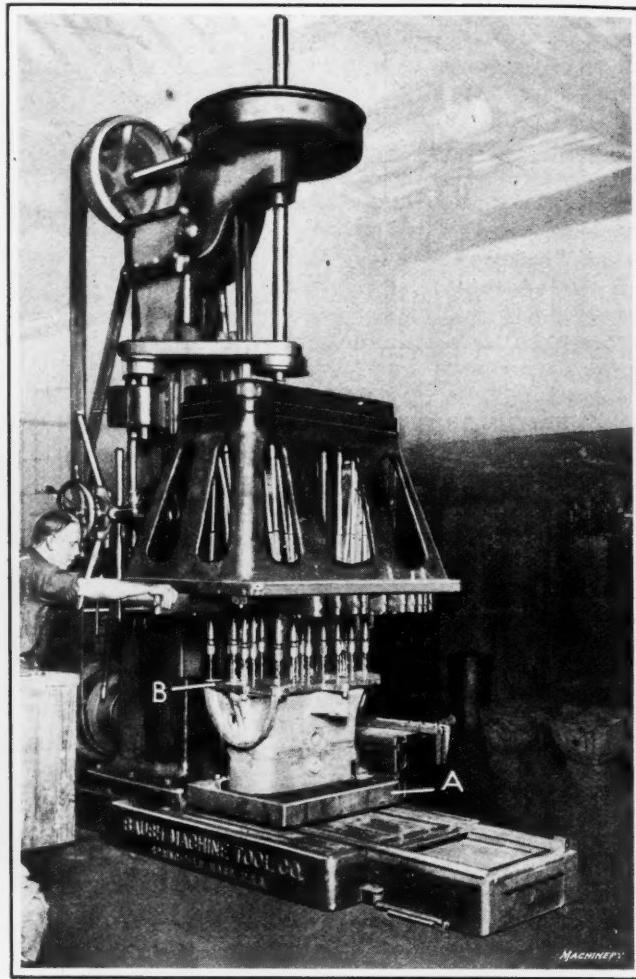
Baush Multiple-spindle Drilling Machine equipped with Sliding Fixture to facilitate loading Casting in Fixture and removing Drilled Work
